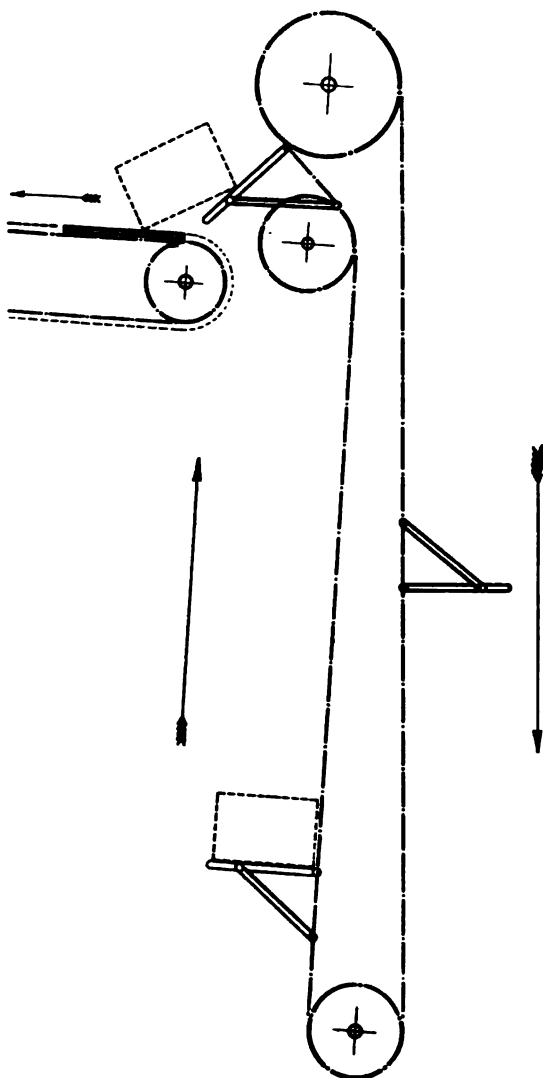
Type of Rigid Arm Elevator, showing Delivery on the ascending side. Built by the Ewart Chain Belt Co., Ltd., Derby.
